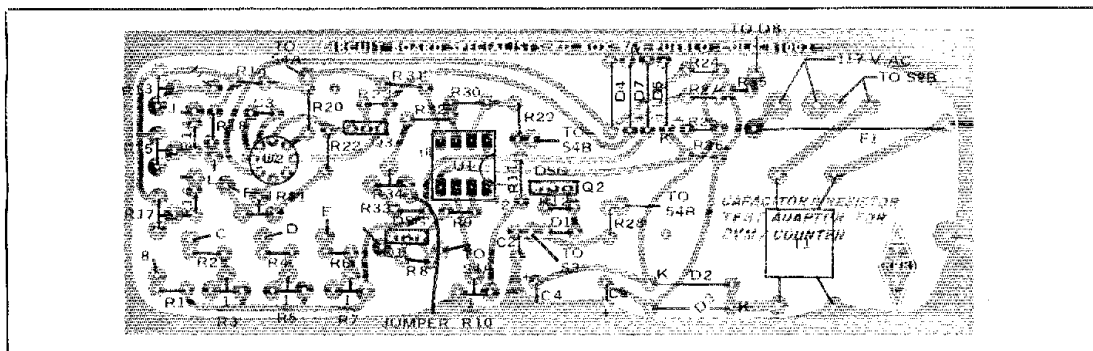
Actual size circuit-board template and parts placement guide. Black represents copper. A jumper is to be connected between the foil common and R34.
